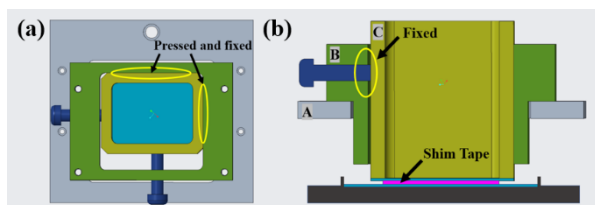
(a) Top view and (b) cross section of the mechanism.
